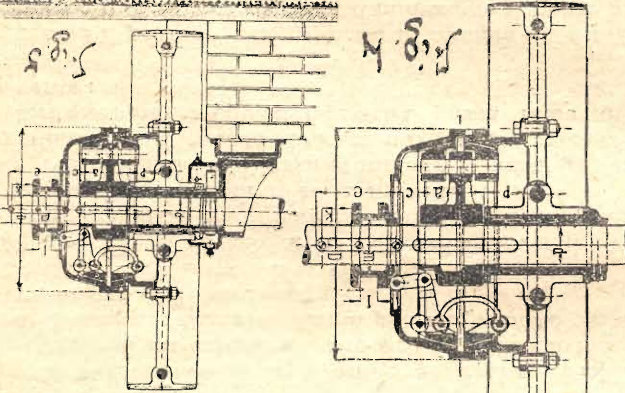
A technical drawing showing the assembly of the clutch components, including the housing, shaft, and internal parts, with various numbered labels.
